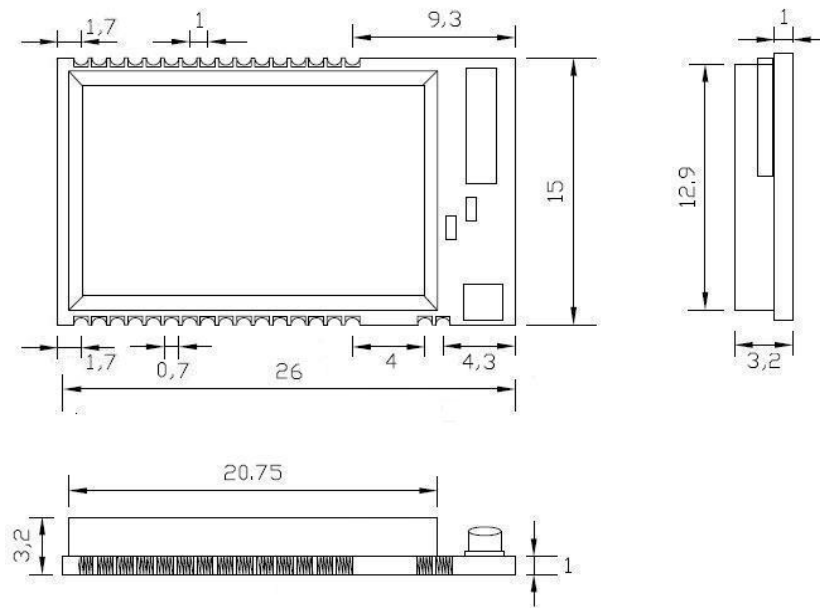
HPTZ01P-TTL Mechanical Dimensions
